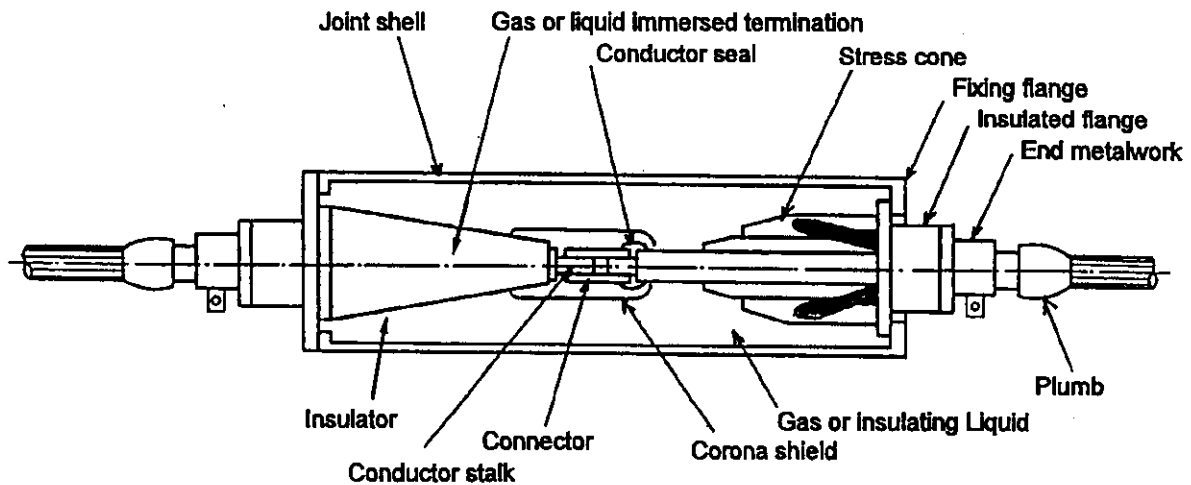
'Back-to-back' joint with one insulator and fluid insulation
